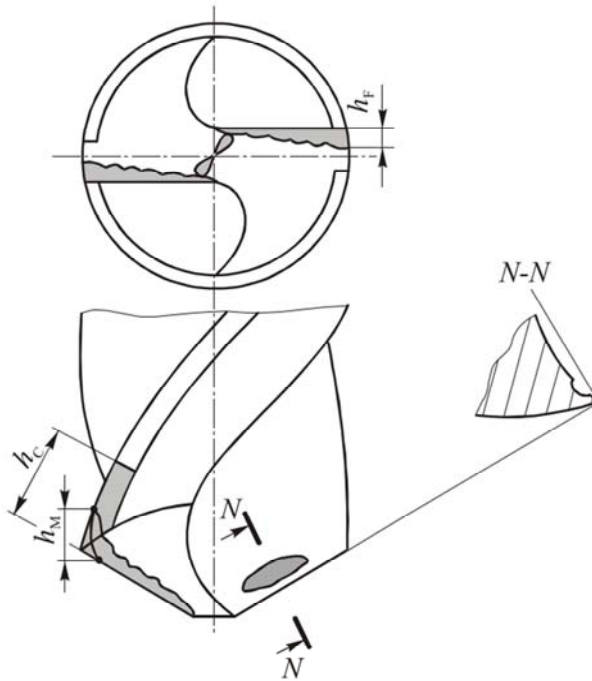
Wear on the rake and clearance surfaces of a twist drill
